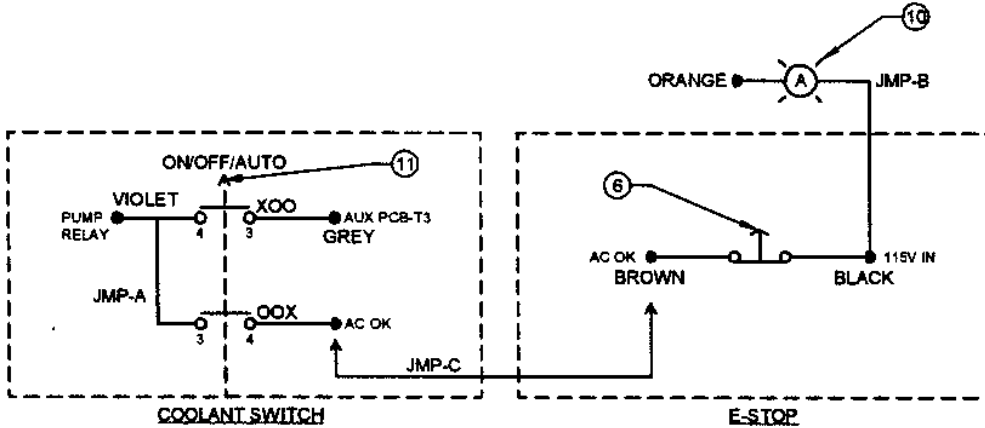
Spindle/Coolant/E-Stop Switch Box
